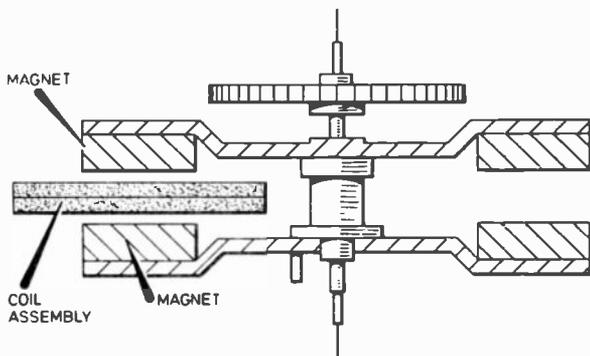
The balance wheel and coil assembly used in some types of transistor driven watches.
